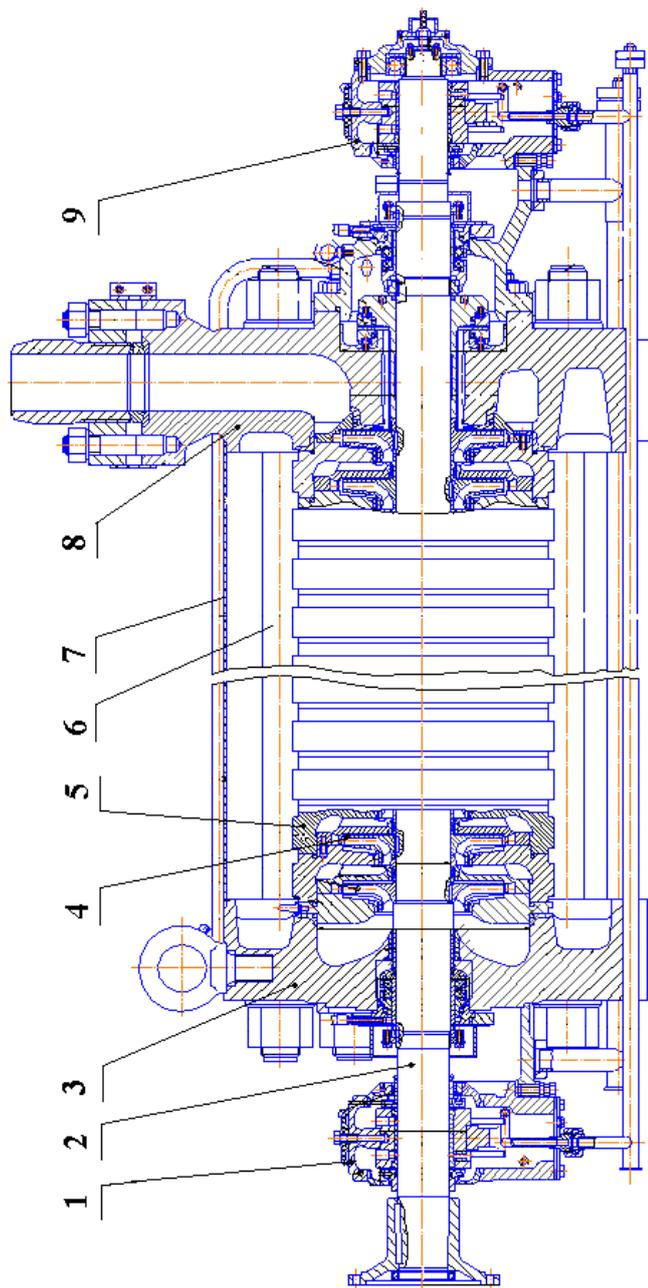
Sectional centrifugal pump: 1 – shaft bearing; 2 – shaft; 3 – suction bonnet; 4 – blower; 5 – guide apparatus; 6 – locking pin; 7 – guard; 8 – discharge bonnet; 9 – shaft bearing
